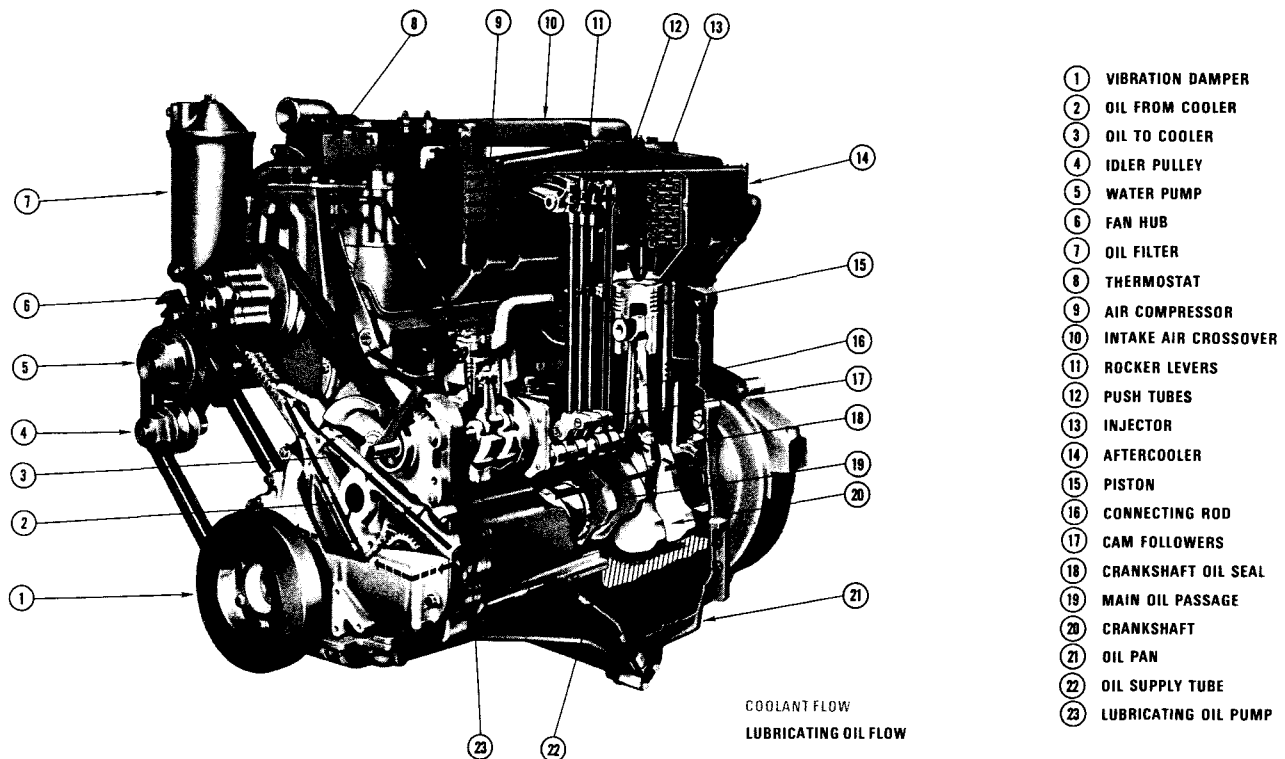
, (LWC-22). Coolant and lubricating oil flow – NTA Inline Engine
